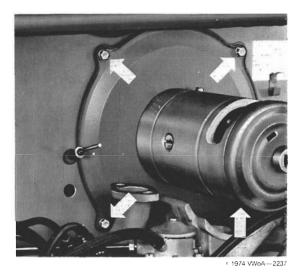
Bolts (arrows) that hold generator and fan cover to fan housing.
